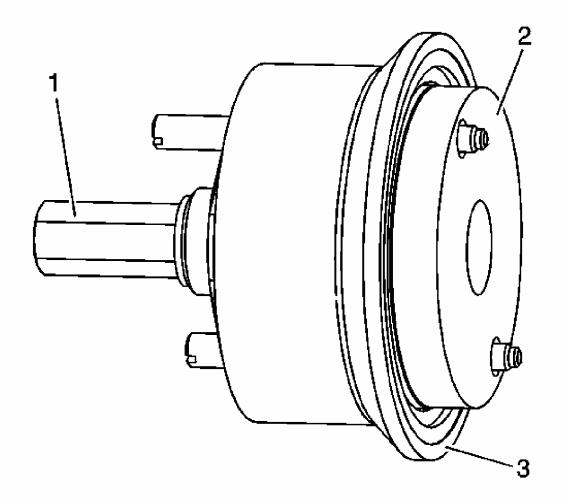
View Of J 45930-A Crankshaft Rear Oil Seal Installer Courtesy of GENERAL MOTORS CORP.
